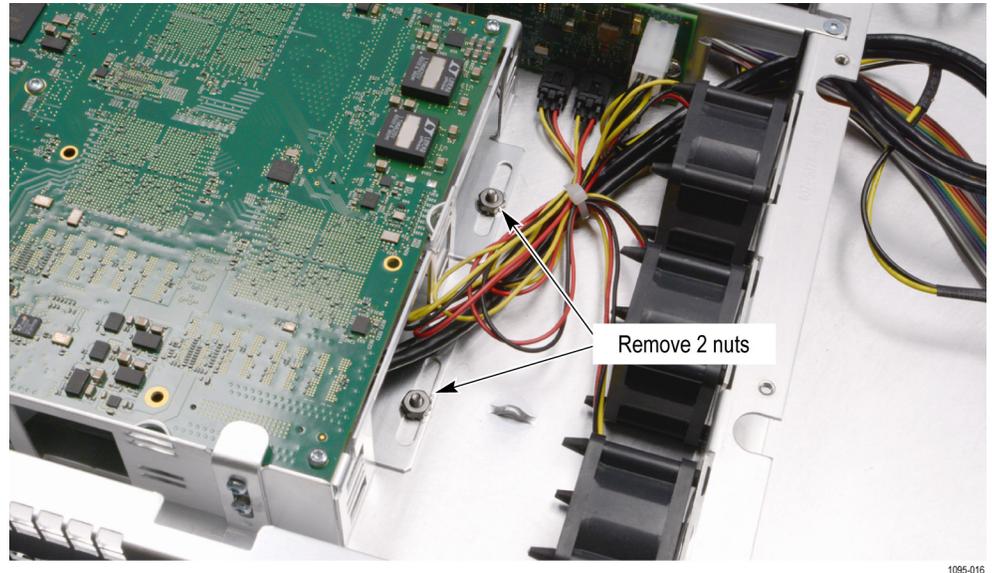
Remove the lock nuts securing the Mixed Media board module to the instrument
